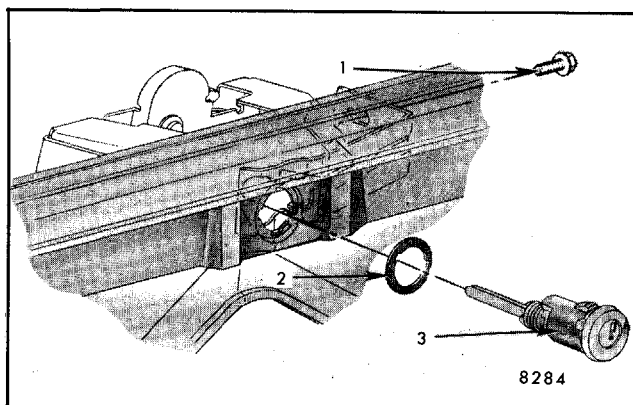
Side Loading Lock Cylinder Retainer - Pontiac "F" Styles
